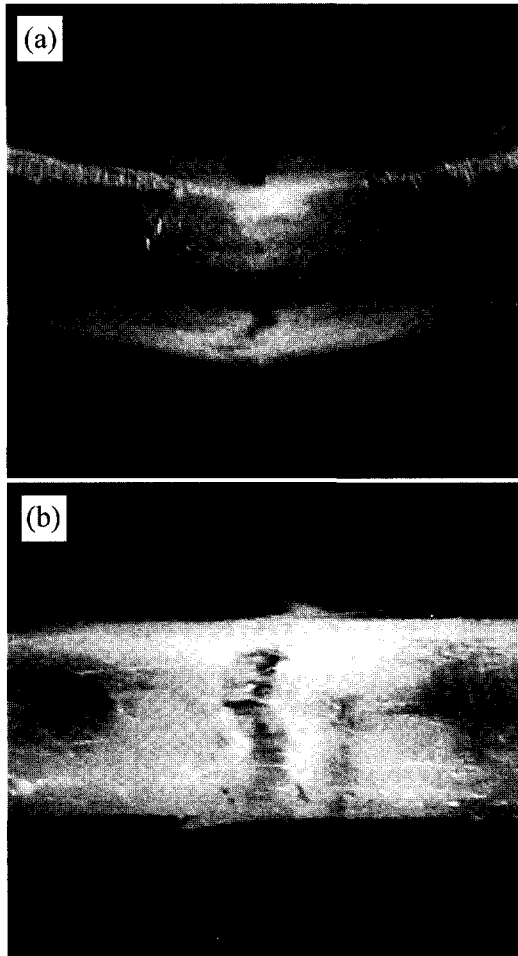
Appearance of fractured CP-GFRP specimen. a) side, b) bottom
